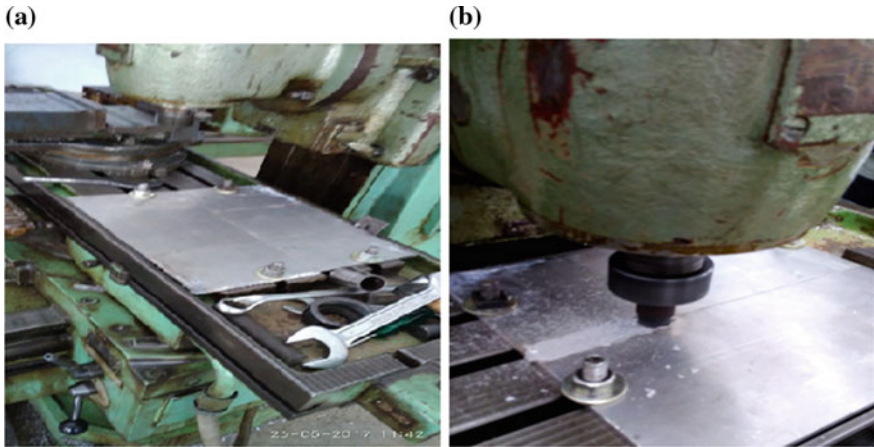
Details of FSW process, a fixture designed to transform a conventional milling machine, b welding operation during FSW
